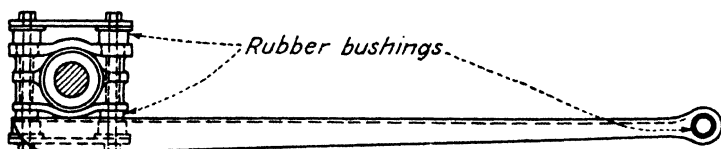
PRESSED-STEEL TORQUE ARM.
